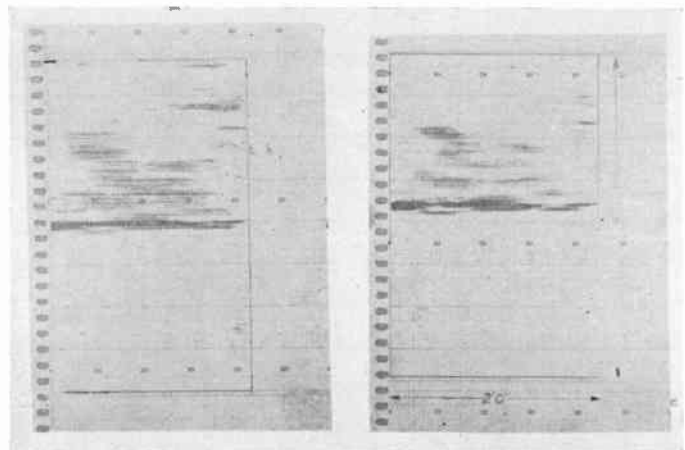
Plan position recording of laminar type defects in a steel plate.
